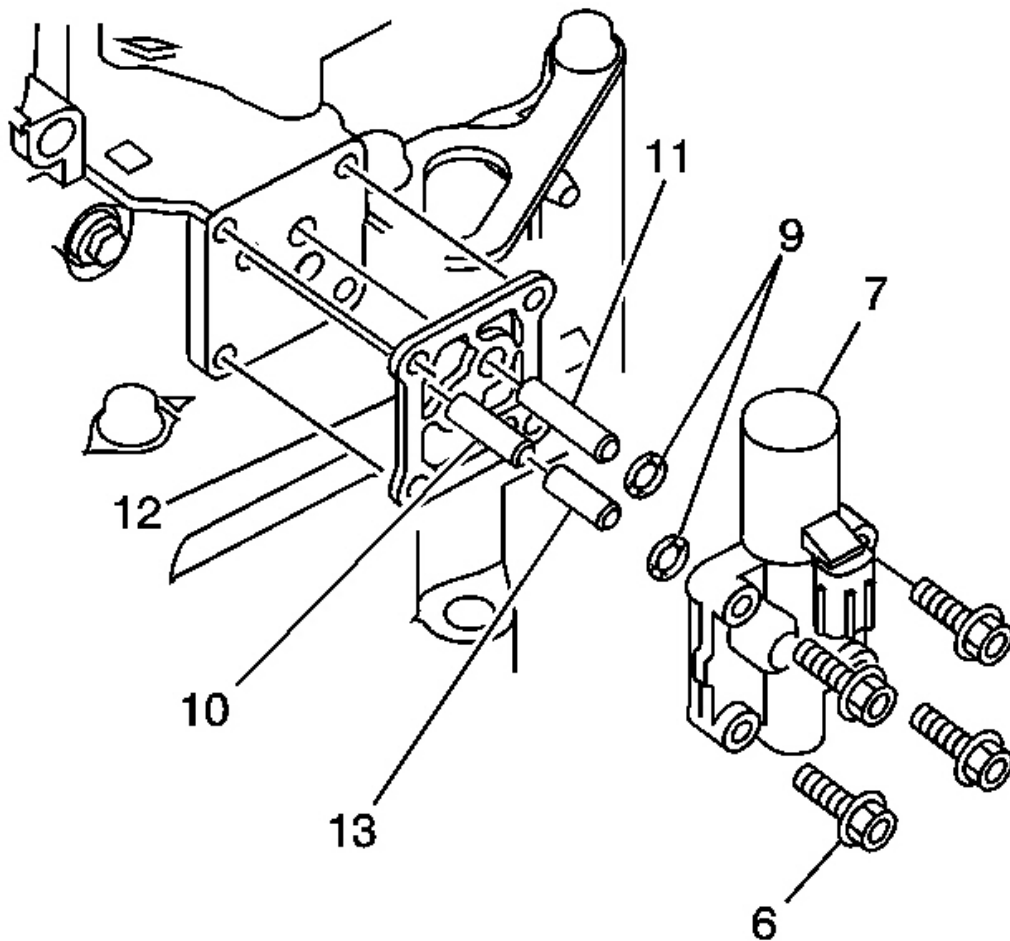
TCC Pressure Control Solenoid Valve, Bolts, O-Ring, Gasket & Fluid Feed Pipes
